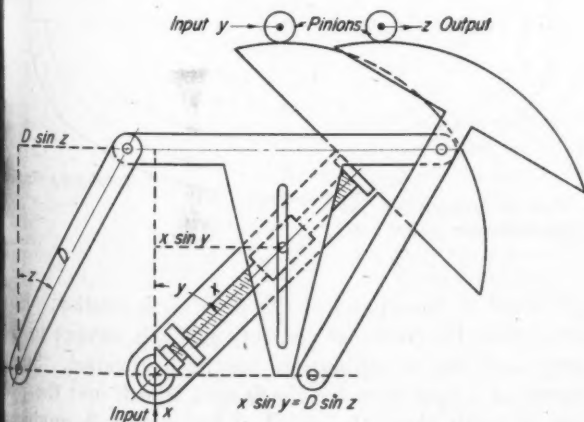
Above—Sector type multiplier, which is mechanically simpler than that shown in Fig. 12 but which involves a slight error in result
